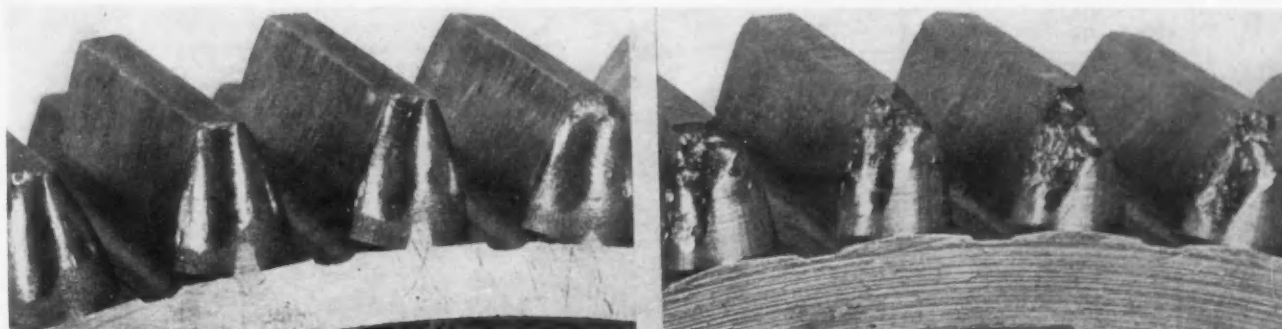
In clash tests the gear teeth at left were shown to have good form; those at right, poor tooth form
